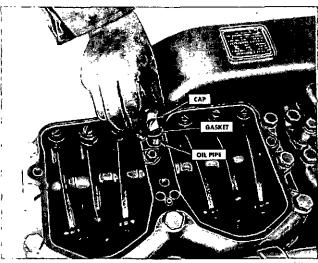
Installing lubricating oil pipe cap — H/NH
